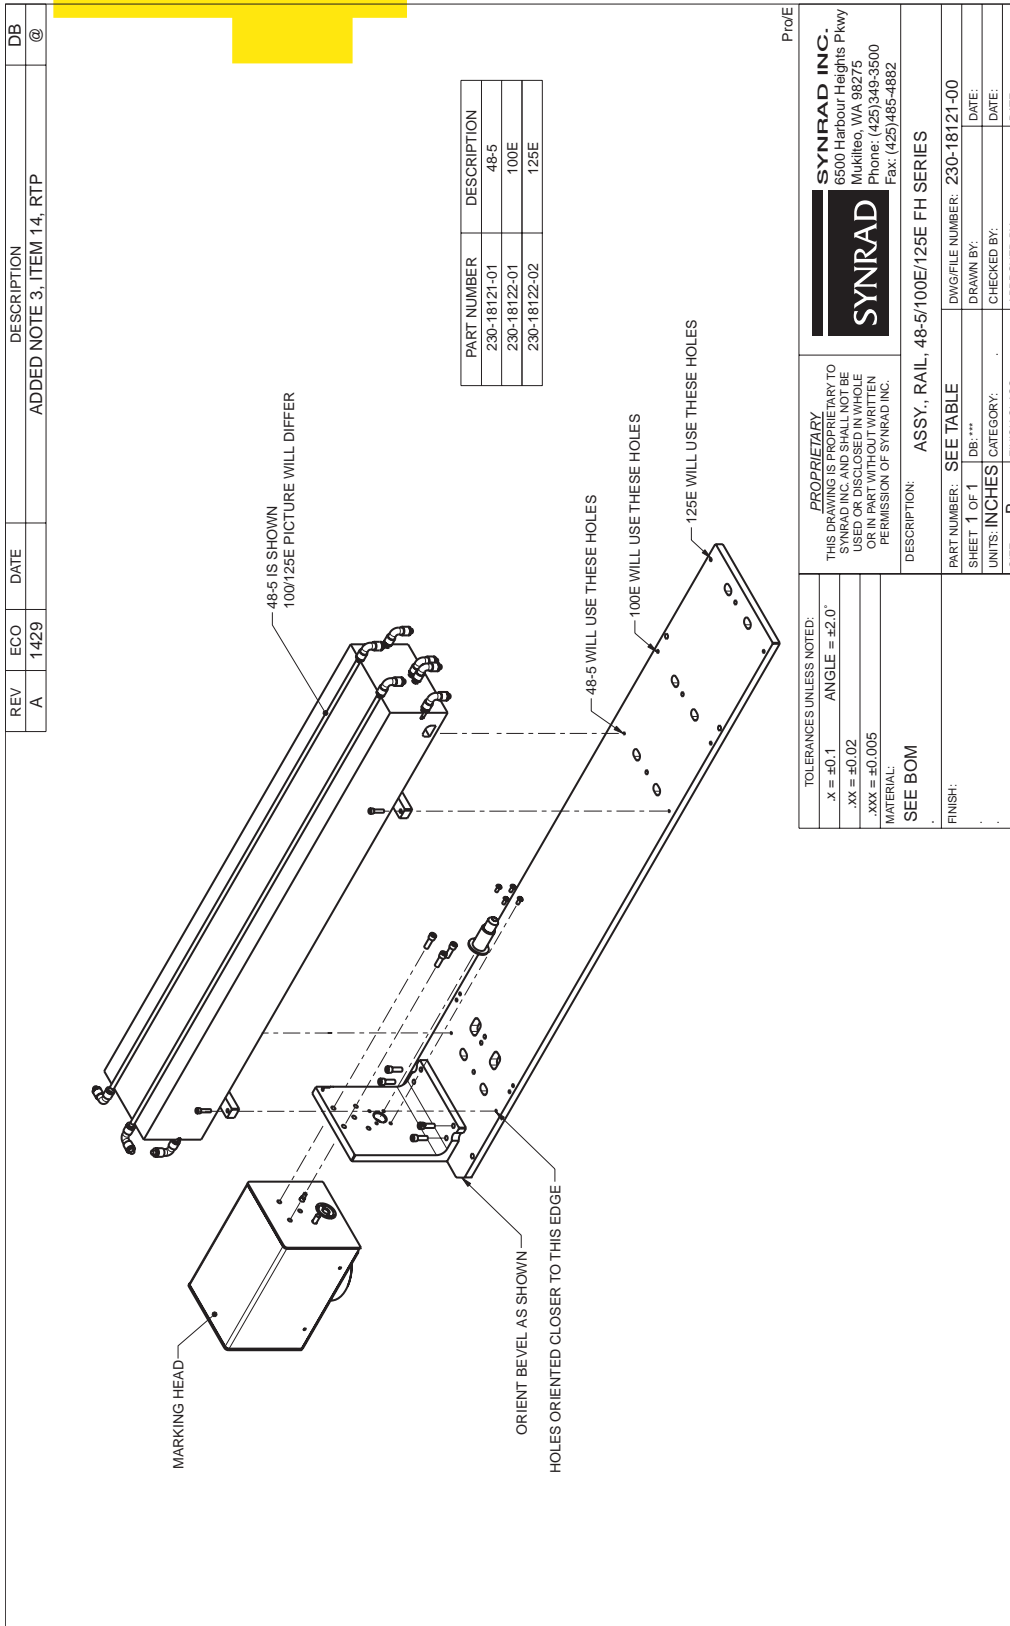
FH Head / Model 48-5/Evolution 100/125 mounting drawing
